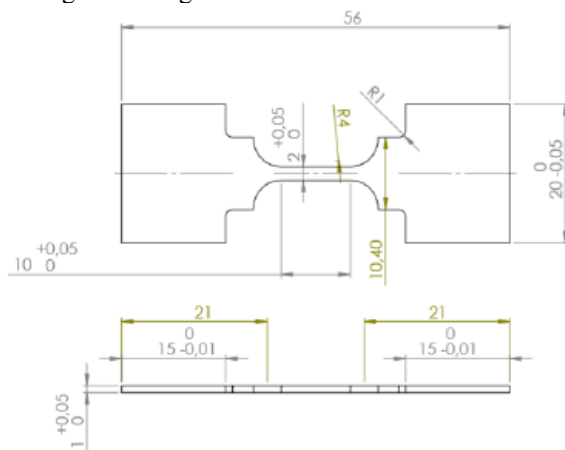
Drawing of the Ti6Al4V sheet specimen used in this study (dimensions in mm).
